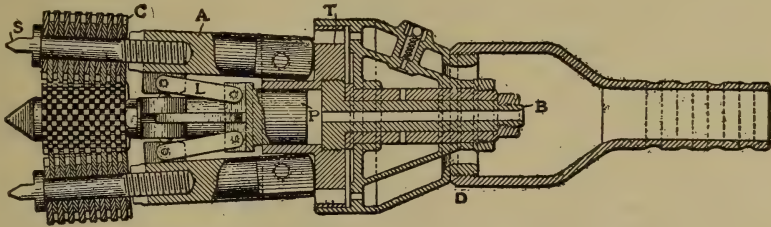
Mechanical Tube Cleaner — Turbine Type
